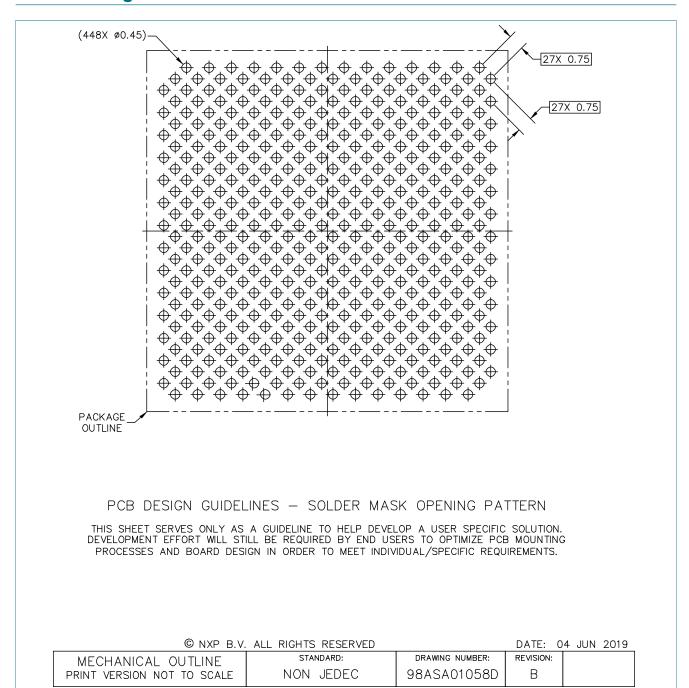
Reflow soldering footprint part1 for FBGA448 (SOT1908-1)
